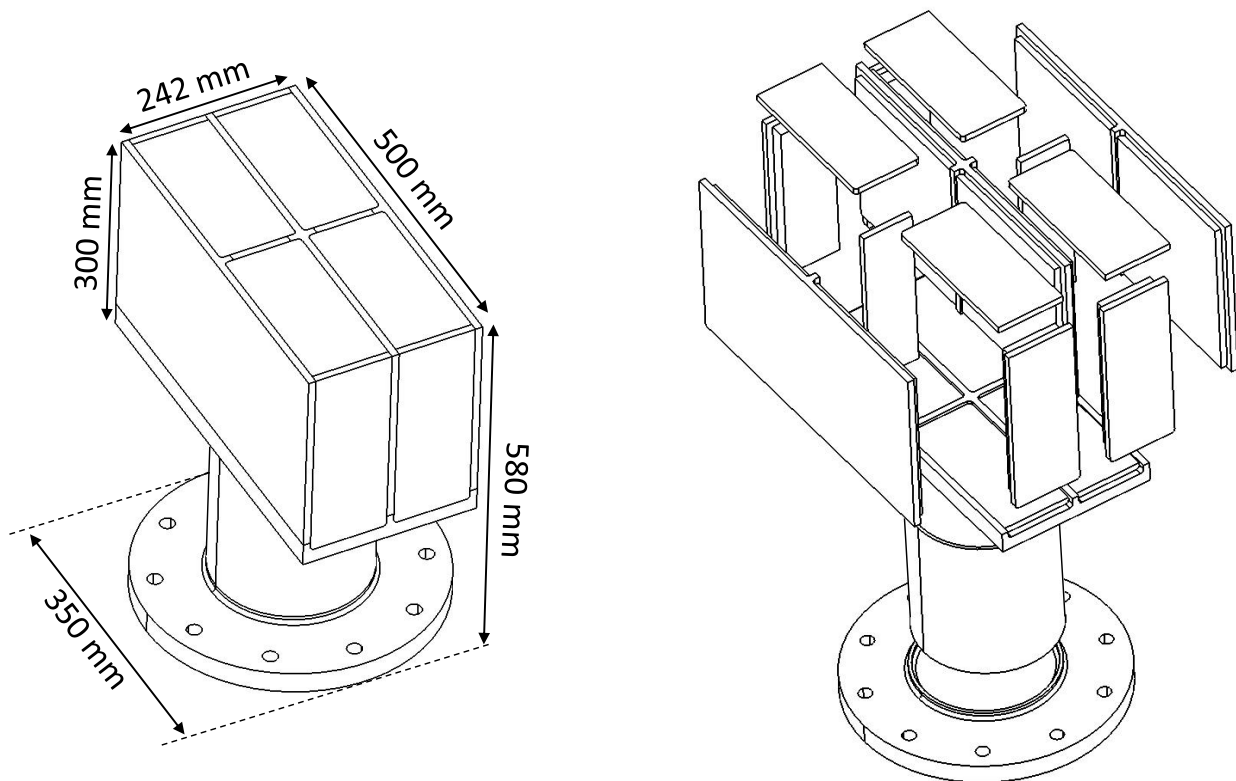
Reduced-sized mock-up: Dimensions (left) and exploded view (right).
